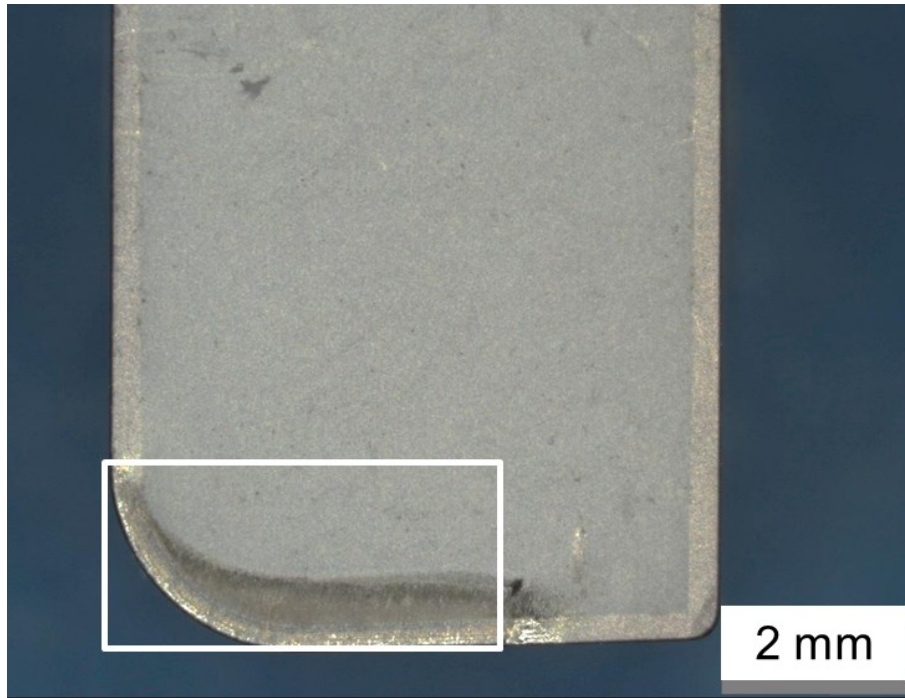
Top view of used milling insert after 1000 tool-workpiece contacts under constant cutting conditions. White margin indicates area of residual stress mapping (see Fig. 3).
